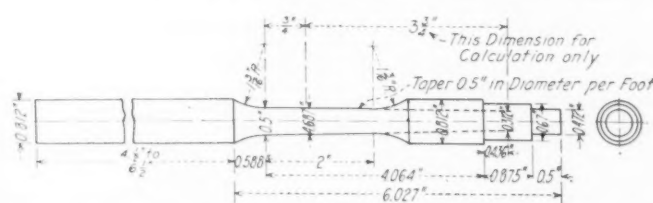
ROTATING-CANTILEVER SPECIMEN USED IN ENDURANCE TESTS
